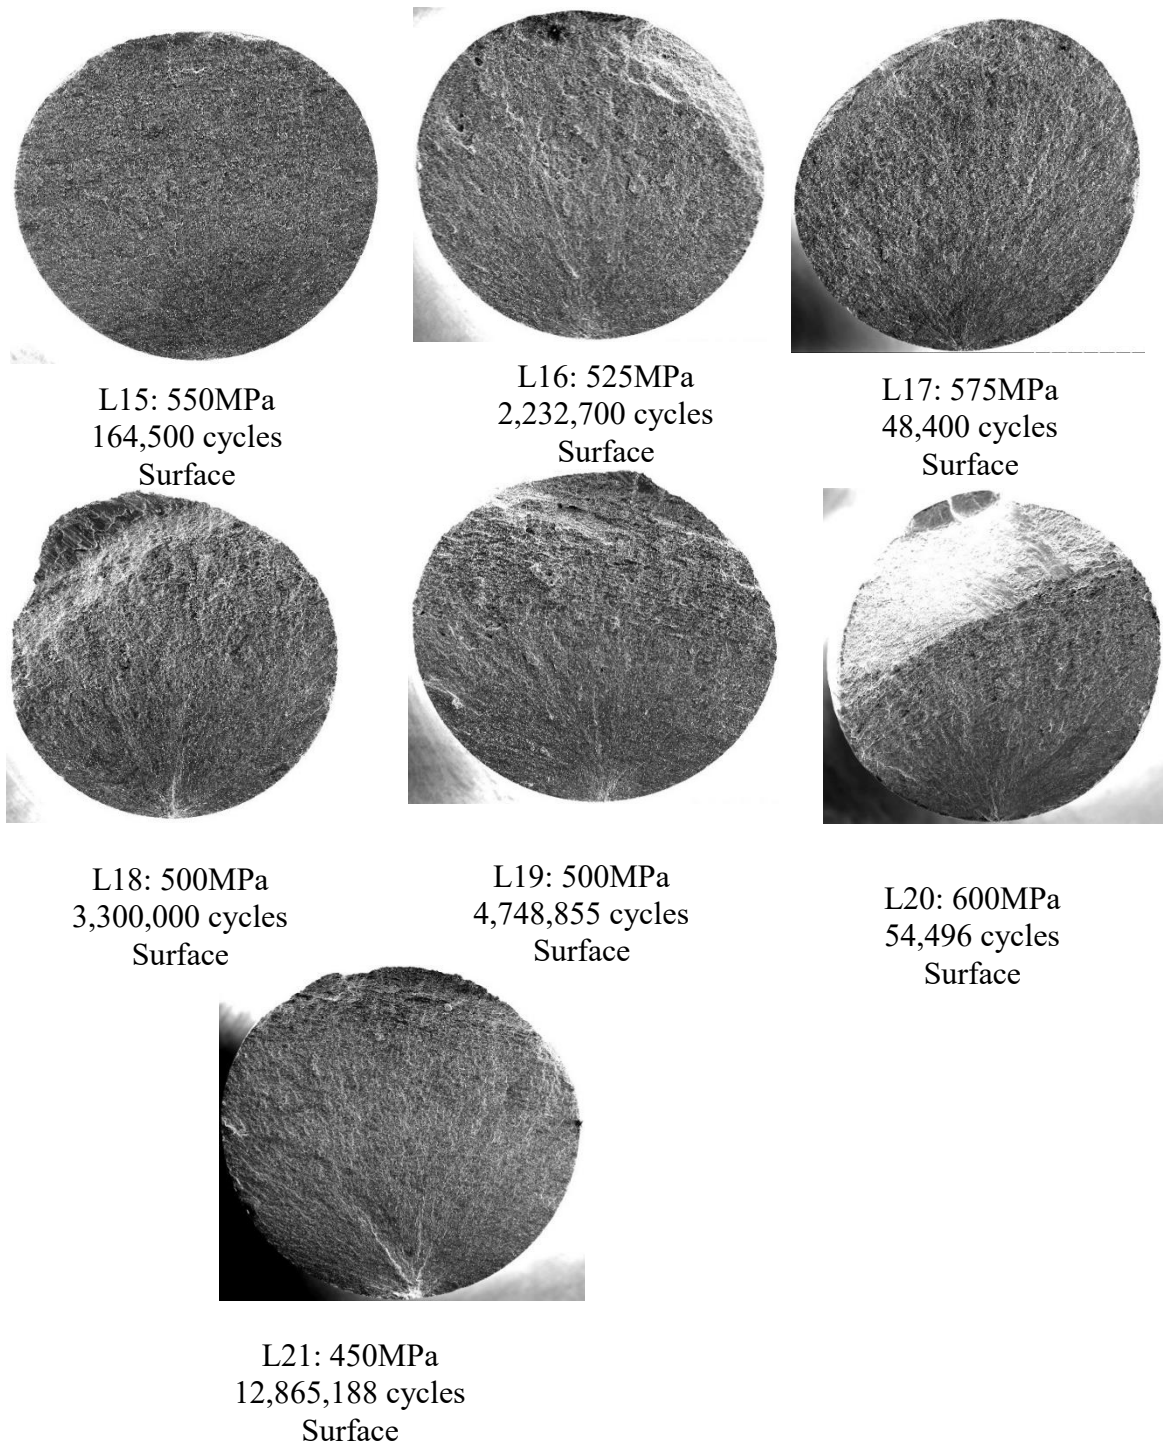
Fracture surfaces of the Ti-407 manufacturer 2 HCF tangential test pieces.
